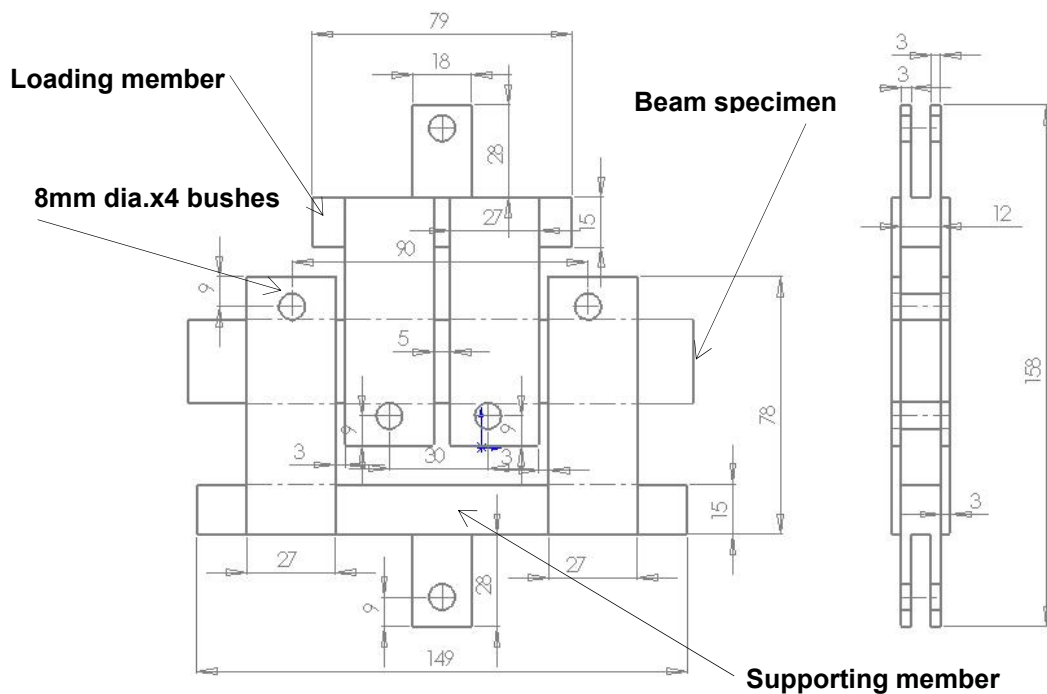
Drawing of fabricated bending fixture (all dimensions in mm)
